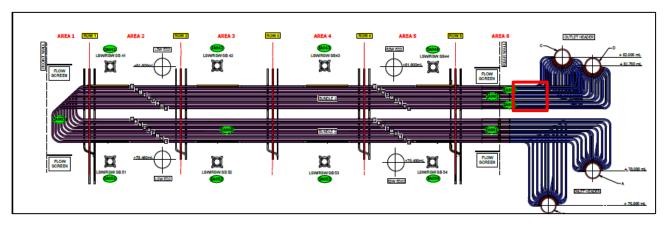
Schematic drawing of RH2 showing where Tube-SOLO inspected should be conducted.
